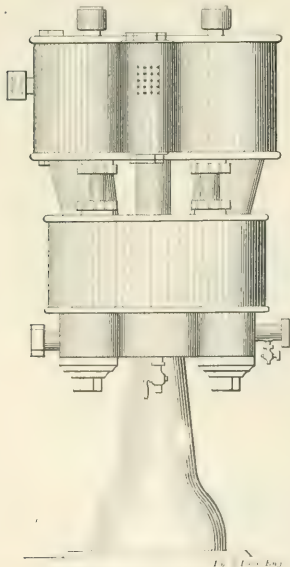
NEW YORK AIR PUMP AND RACK IN VERTICAL POSITION.
